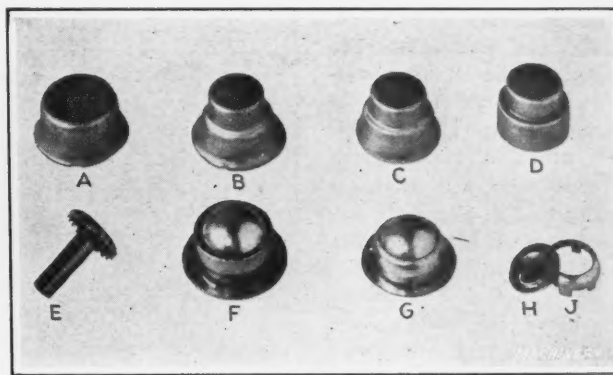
Various Steps in forming the Shells; also Condition before and after Shell is closed about the Ball
